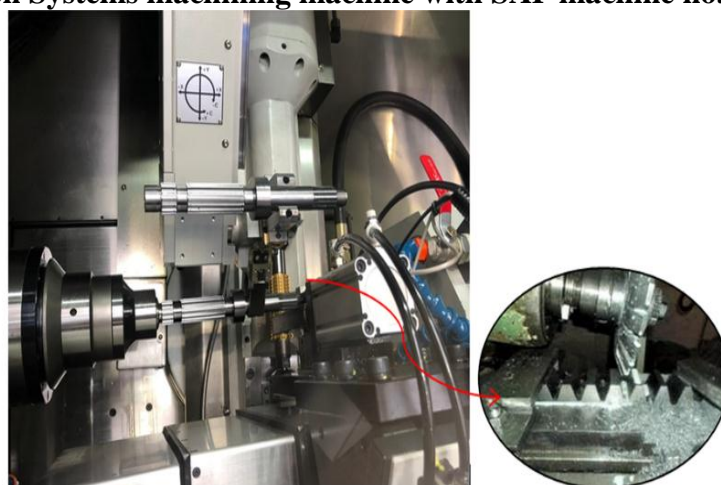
Rack and Pinion Systems machining machine SAP machine no. (9601486) in JMT Auto ltd.
